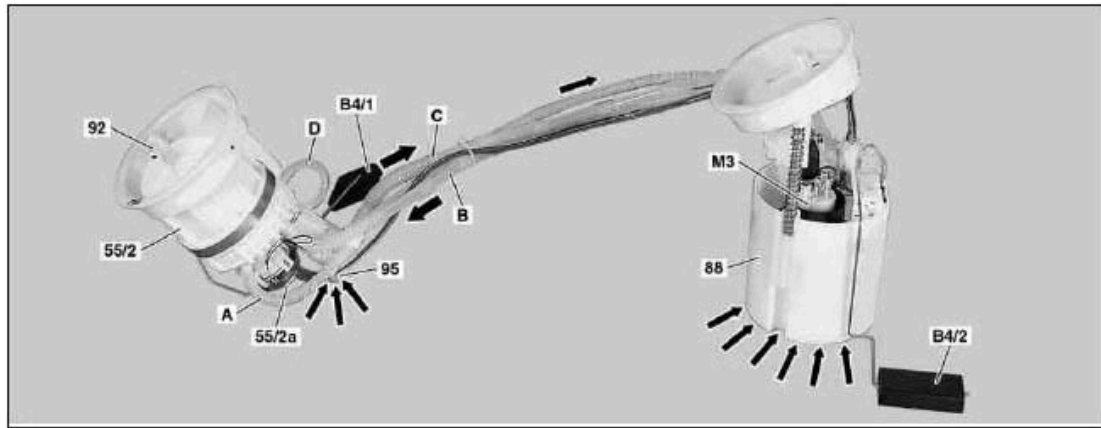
Identifying Fuel Tank Components - Model 203 With Engine 272.970/960 (1 Of 2)
